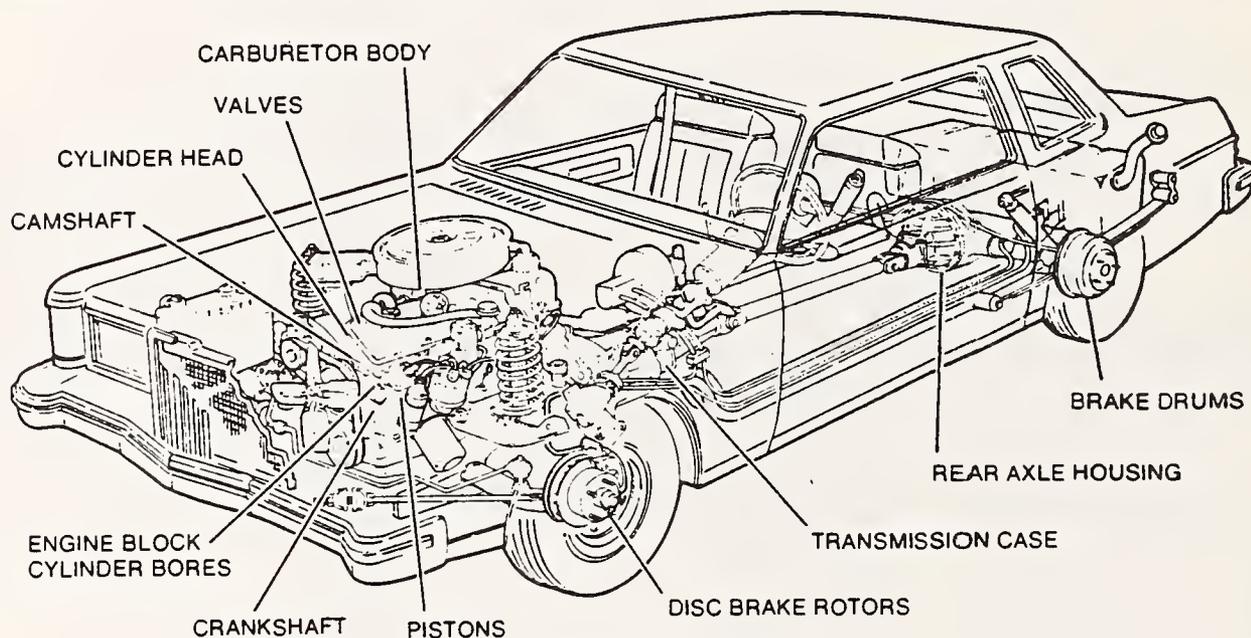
SCHEMATIC DIAGRAM OF AUTOMOBILE SHOWING PARTS AND COMPONENTS WHICH ARE MACHINED
